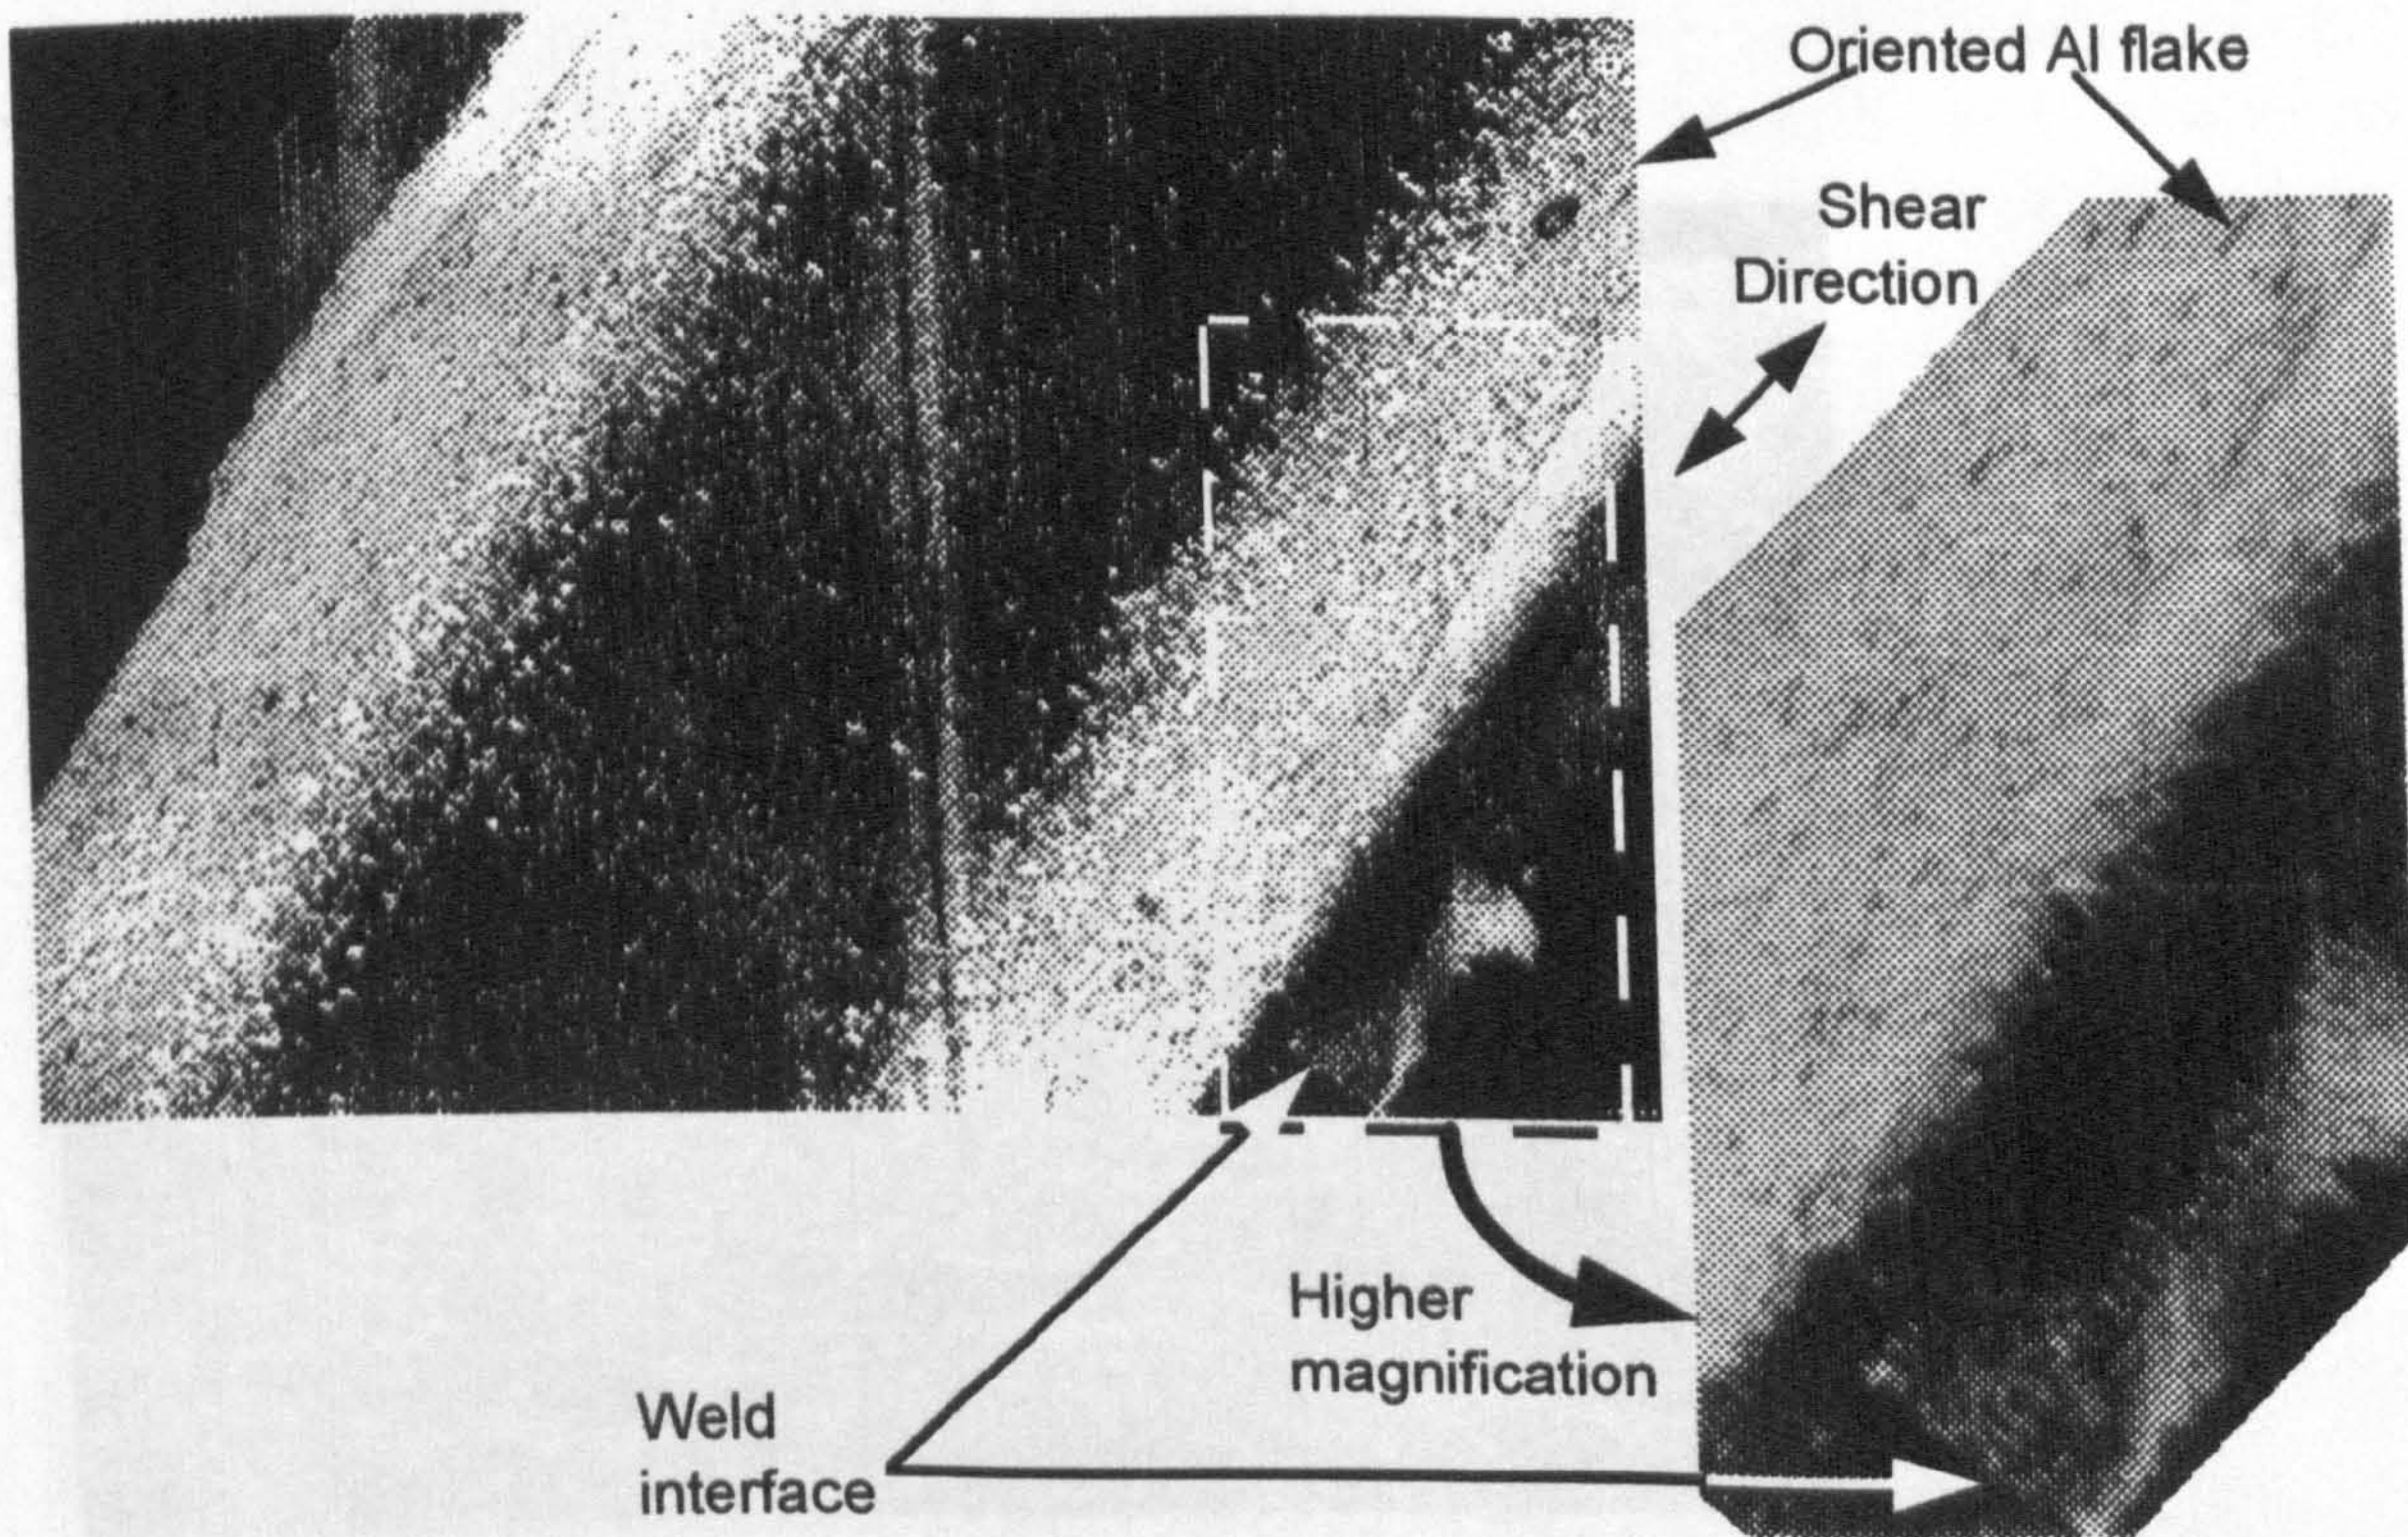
Microtomed section of a 2-colour iPP SCORIM moulding produced using a single shear incorporating a 5.0 second delay. The initial weld line can be seen at the edges of the section before SCORIM displaced it. The displaced weld line is acutely angled to the surfaces of the sample, and the Al flake present in the material at one side of this interface can be seen to have oriented preferentially in the flow direction by virtue of shear from SCORIM.
